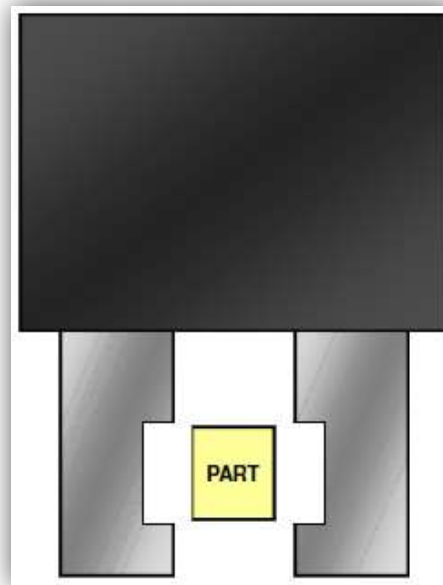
Picture showing part to be held by geometrical constraint [40]
